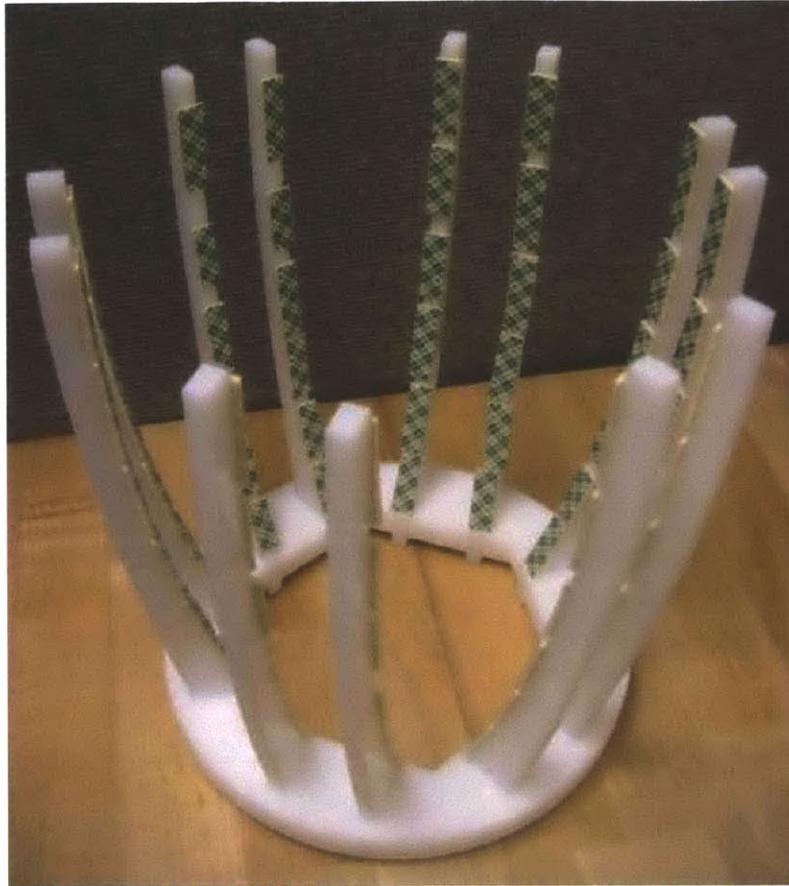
Partial assembly of Prototype 2; double-sided tape on ribs, ready for attachment of facets.
